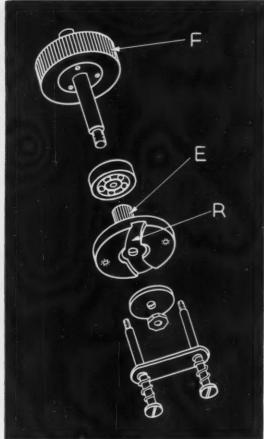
Exploded view shows the friction coupling between gears (E) and (F).
